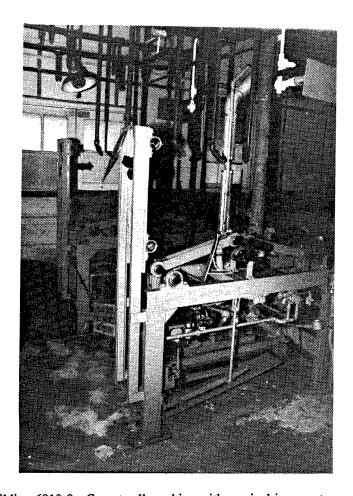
Building 6810-9: Carpet roll machine with an air driven motor.
